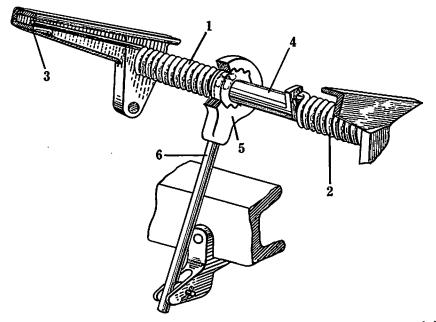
Counterbalance Mechanism for Star Base Machines. Springs l and 2 are held under tension by sleeve 4, yoke 5 and rod 6. The front ends of the springs bear against the lower magazine frame 3 and counterbalance the frame while it is being shifted forward or backward. The springs are under maximum tension when the upper magazine is in operating position.
